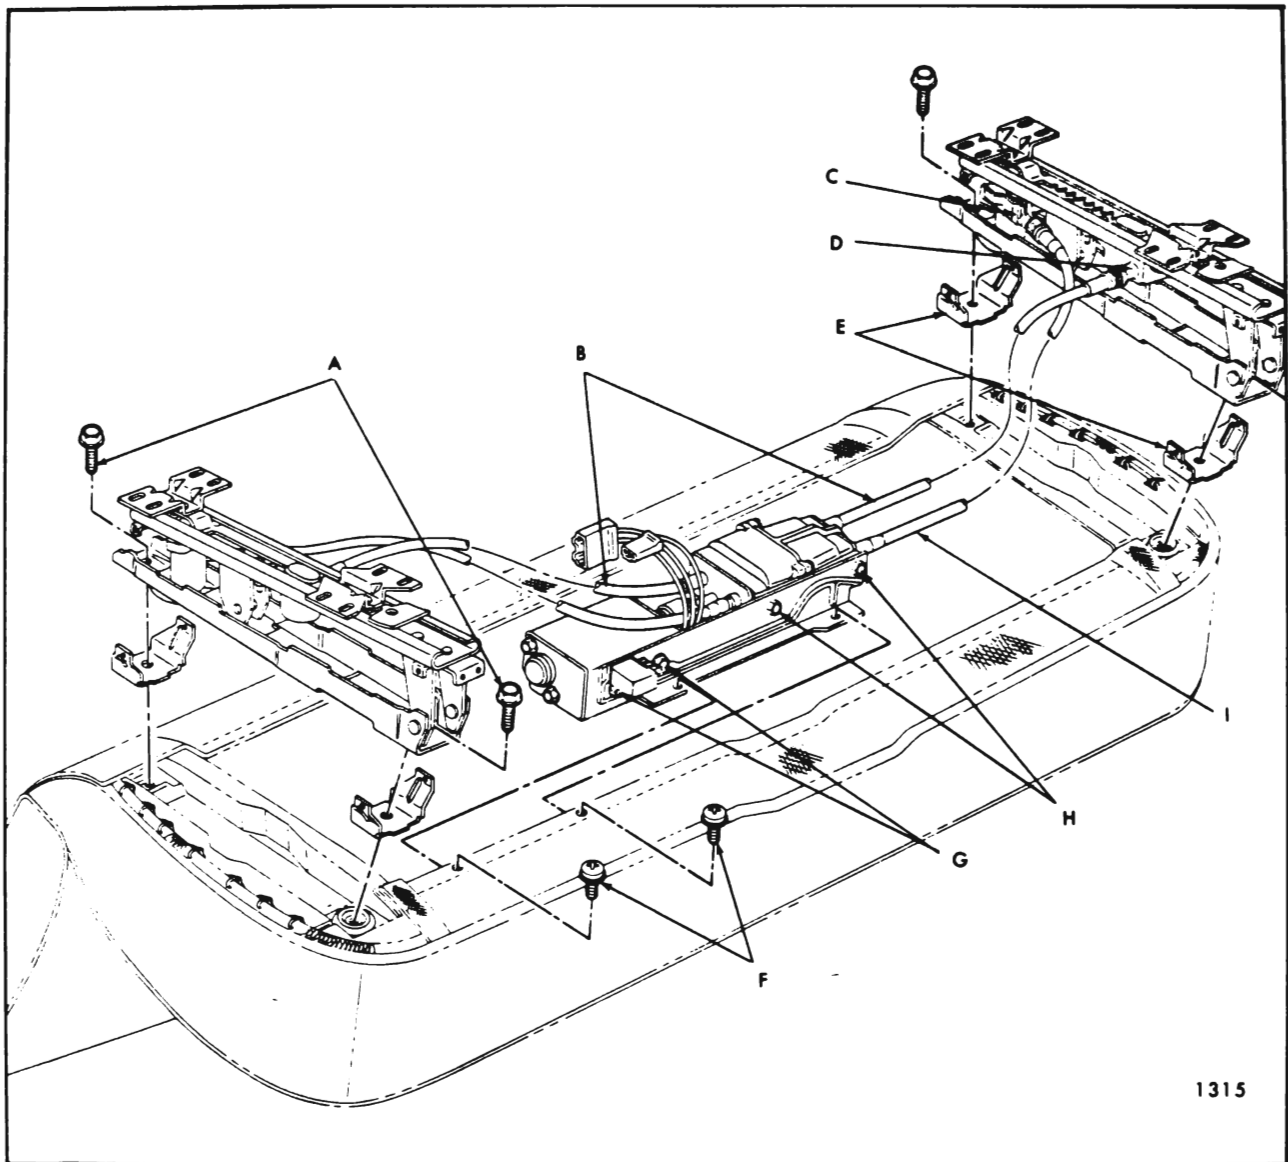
Front Seat Assembly - Four-Way Tilt - Buick "B, C & E" Styles
